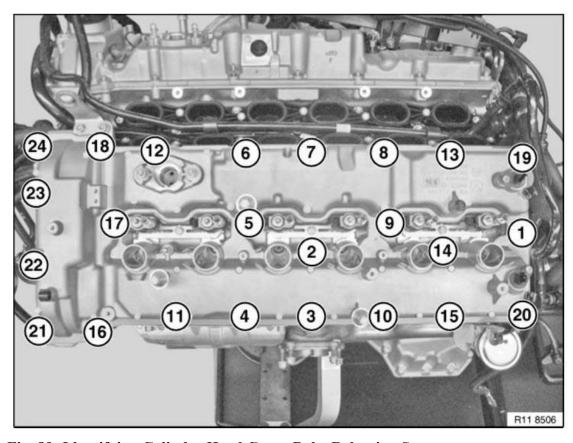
Identifying Cylinder Head Cover Bolts Releasing Sequence
